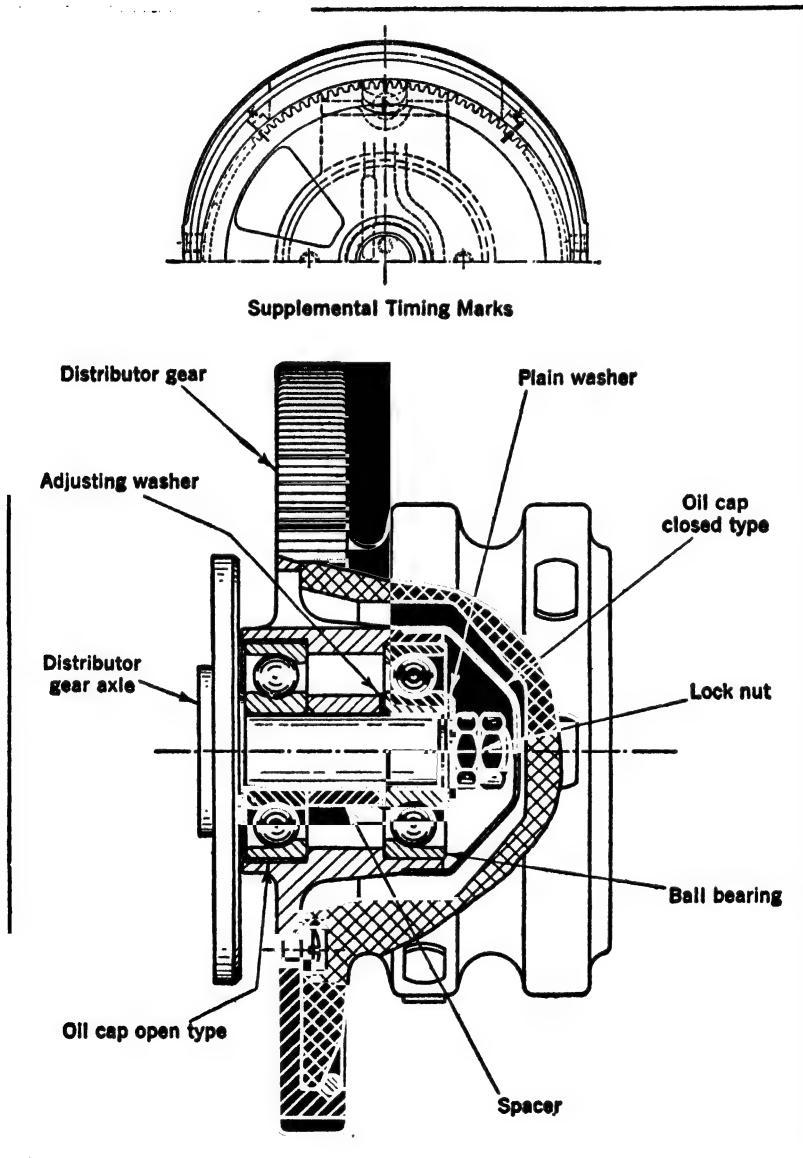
Ball Bearing Distributor Gear Assembly of Type VAG Scintilla Magneto.
